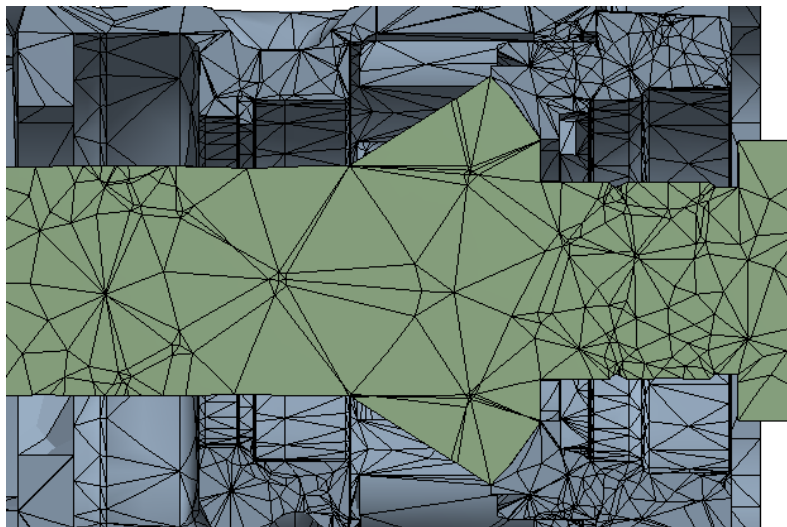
Detailed View of the Simplified Spherical Thrust Bearing Contact
